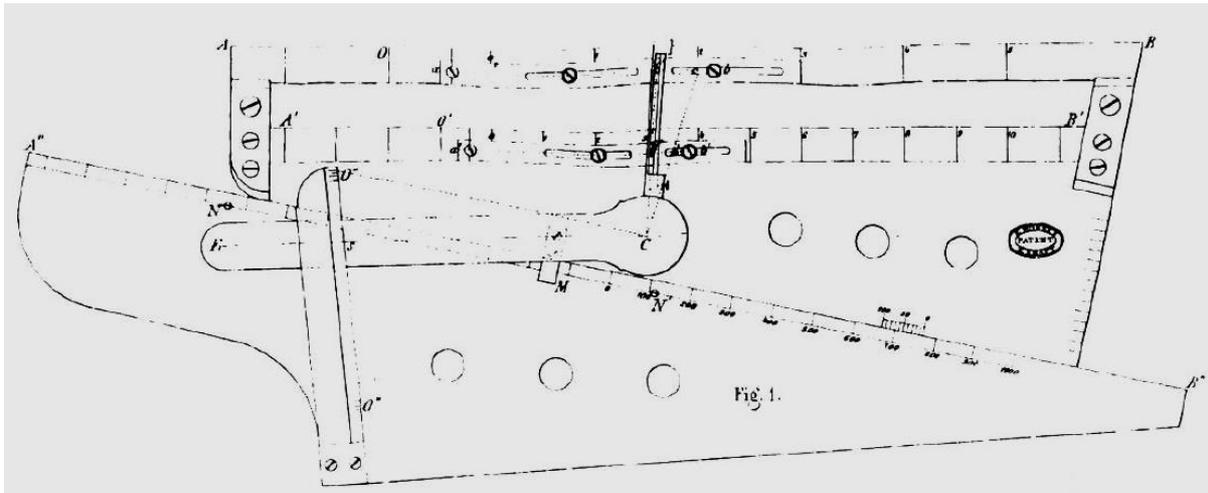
Horsky's planimeter (Source: [Hor1850]).
